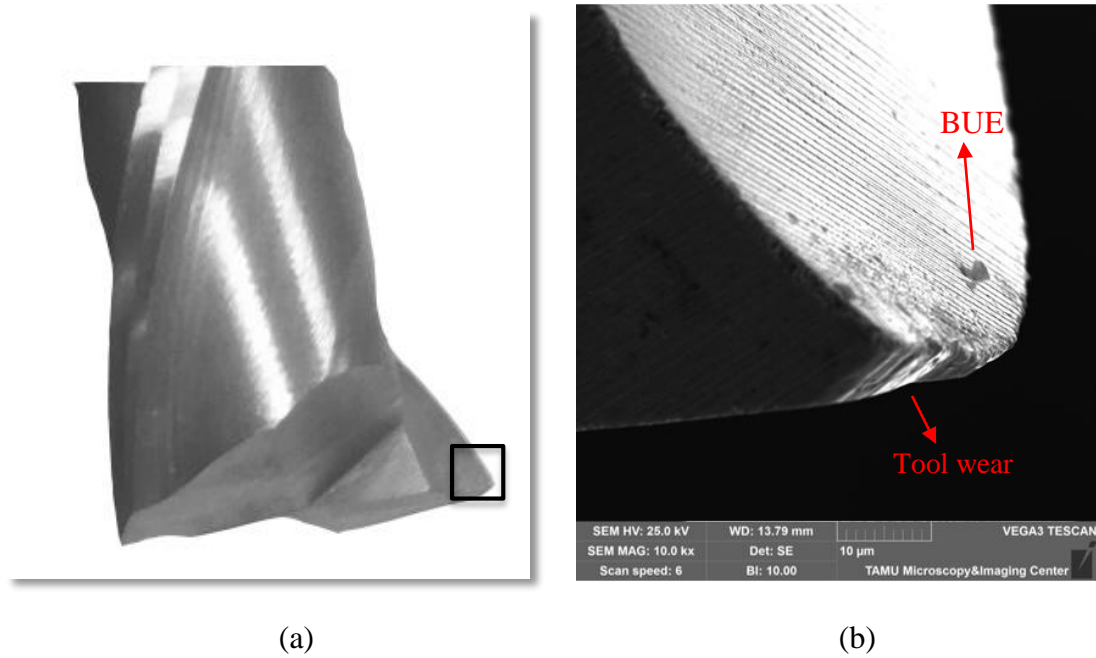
(a) Flat end mill showing view area of micro end mill tool. (b) Scanning electron microscopy image of rake surface and cutting edge. Uncoated WC tool with BUE, $\Phi 0.406$ mm, 60 m/min speed, 1 $\mu\text{m}/\text{tooth}$ chip load, 30 μm depth, 24 mm milling length, MQL.
